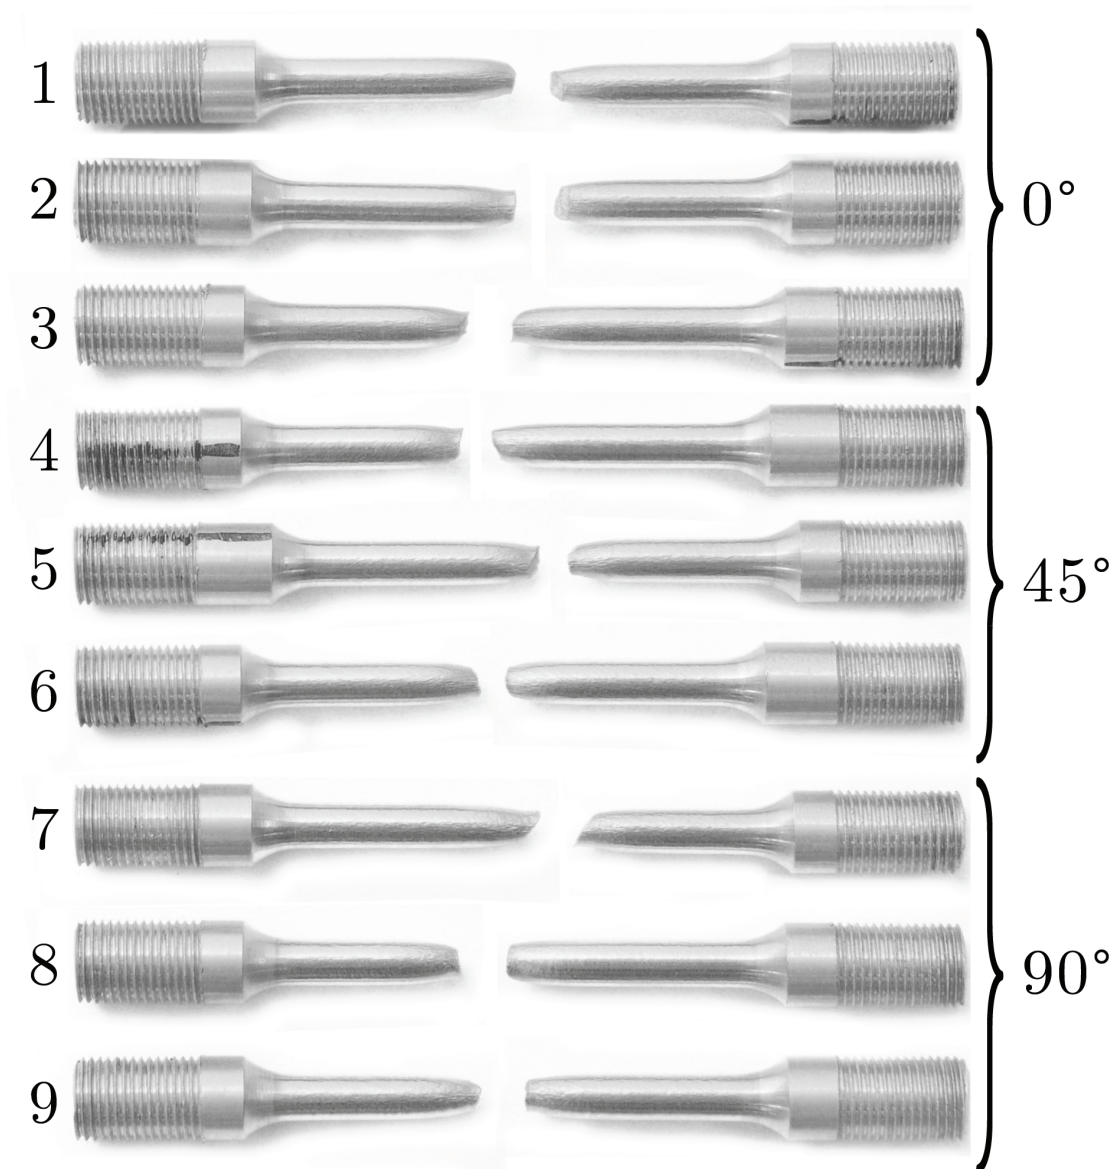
Tensile specimens post fracture for all AA6070-O tests.
